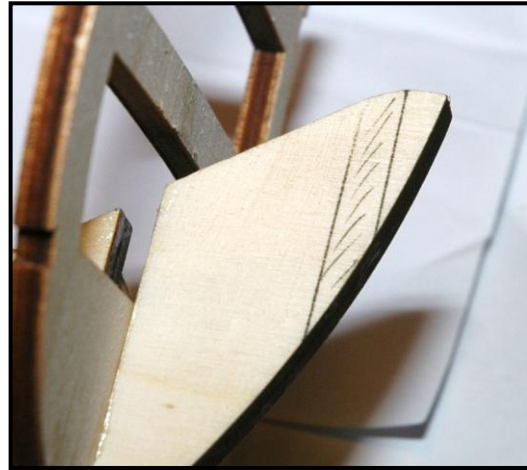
False Keel Showing Marking for the Fitting of Frame 1
